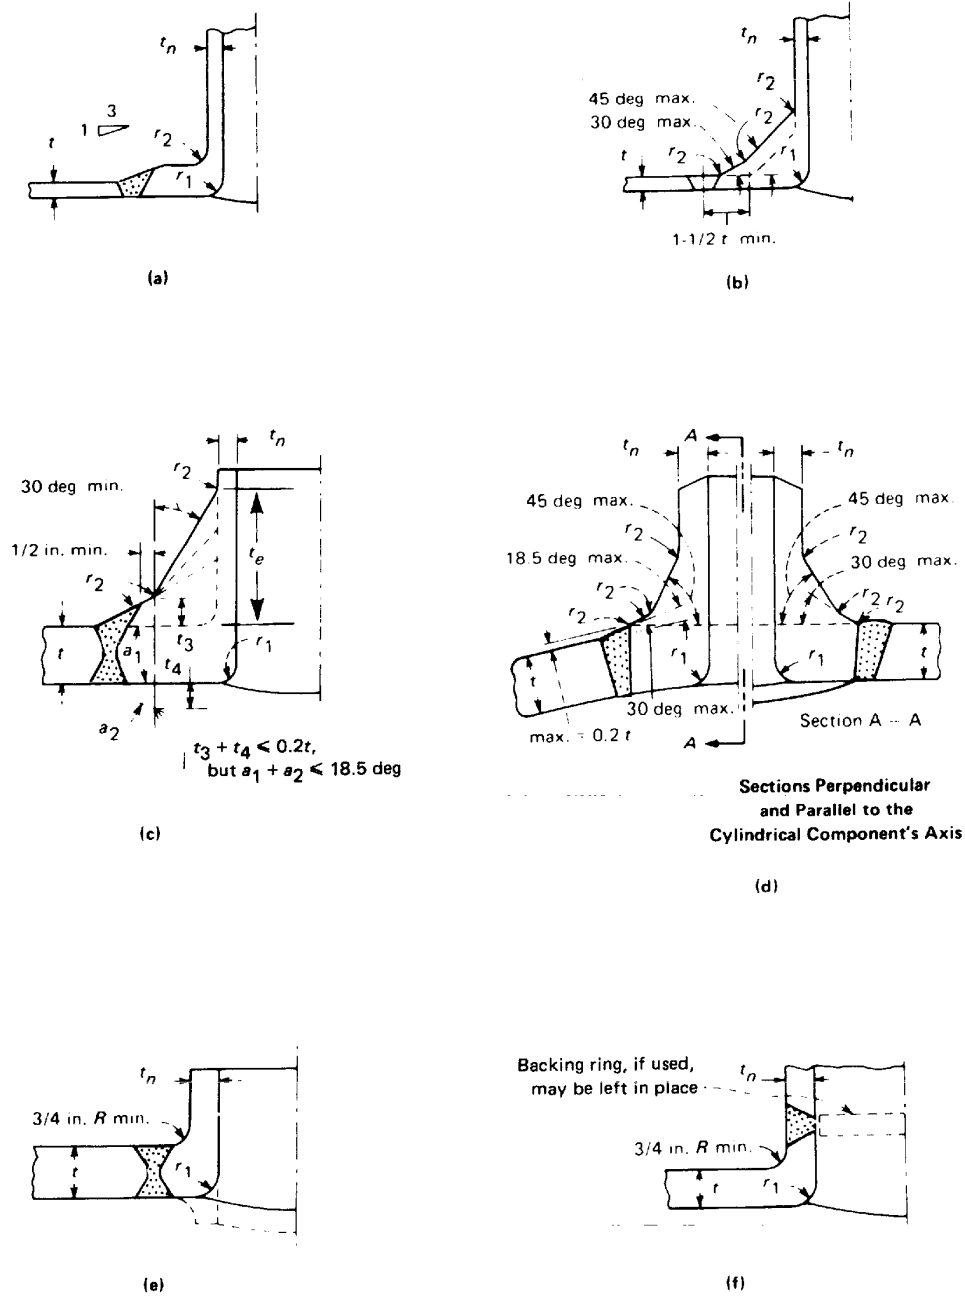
(a)-1 NOZZLES, AND BRANCH AND PIPING CONNECTIONS JOINED BY FULL PENETRATION BUTT WELDS
